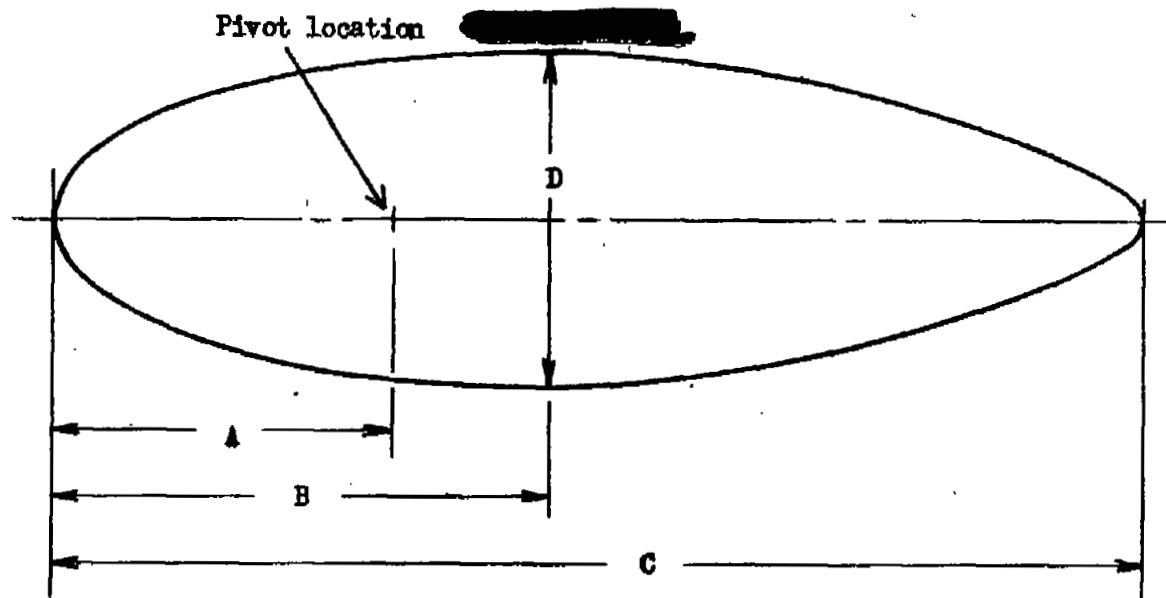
Location and details of wing-tip skids. (Dimensions are in inches, full size.)
